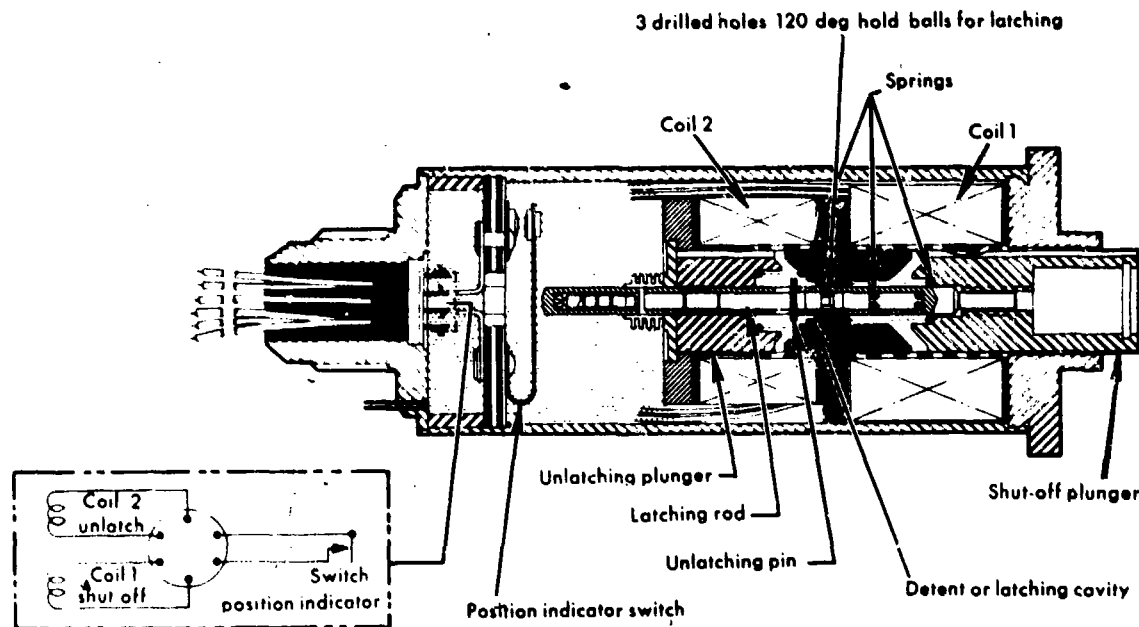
Detent Ball Mechanical Latching Solenoid
